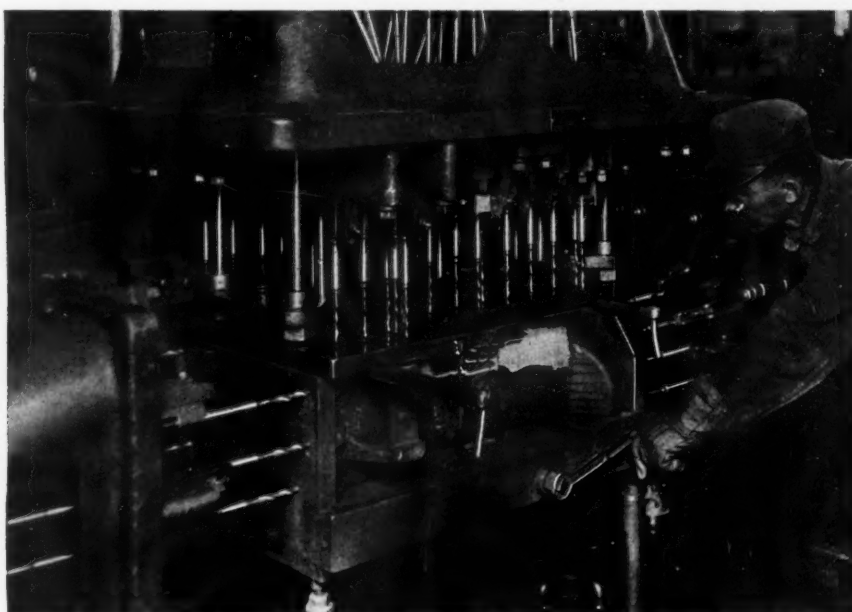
At the right—Sixty-four spindle machine which drills practically all the holes in the bottom of the case and on both ends, operating from three sides
